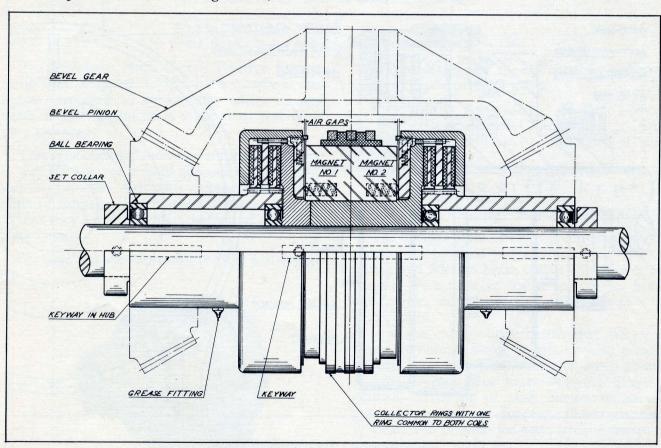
A. Line drawing shows details of Style "ED" Duplex Clutch. Dotted lines indicate gear and pinion arrangement for reversing application.
